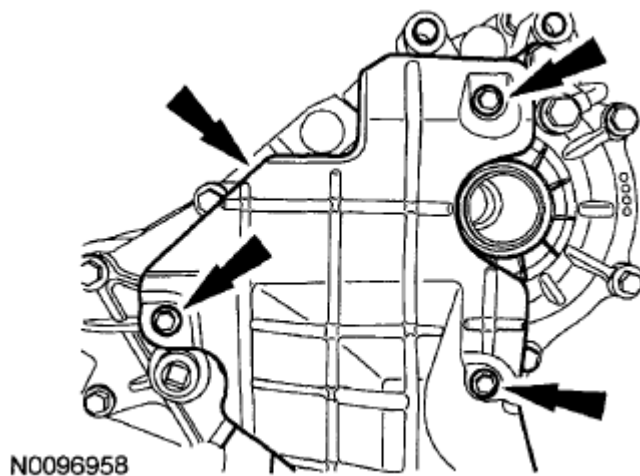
Locating Power Transfer Unit (PTU) Heat Shield And Bolts
